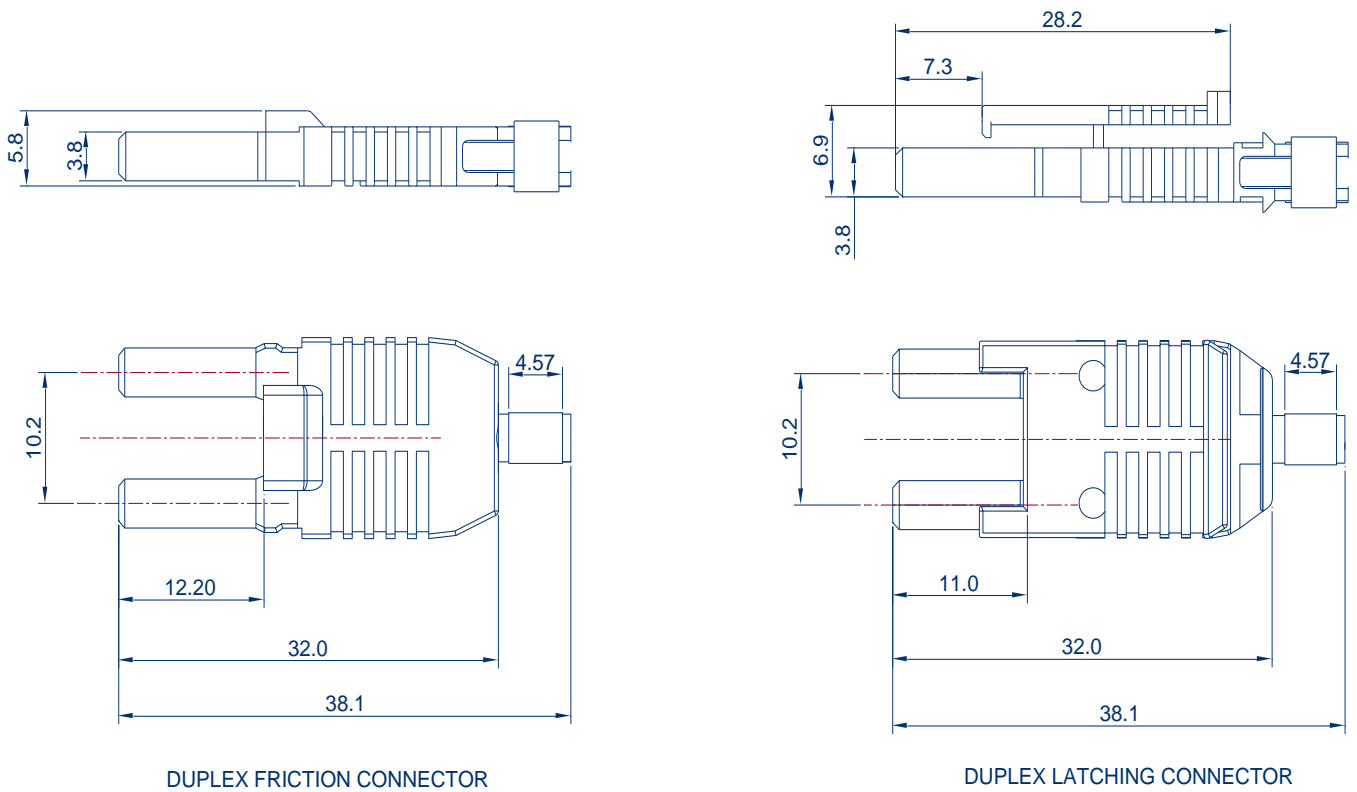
Duplex Non-Latching and Latching Plug mechanical dimensions
